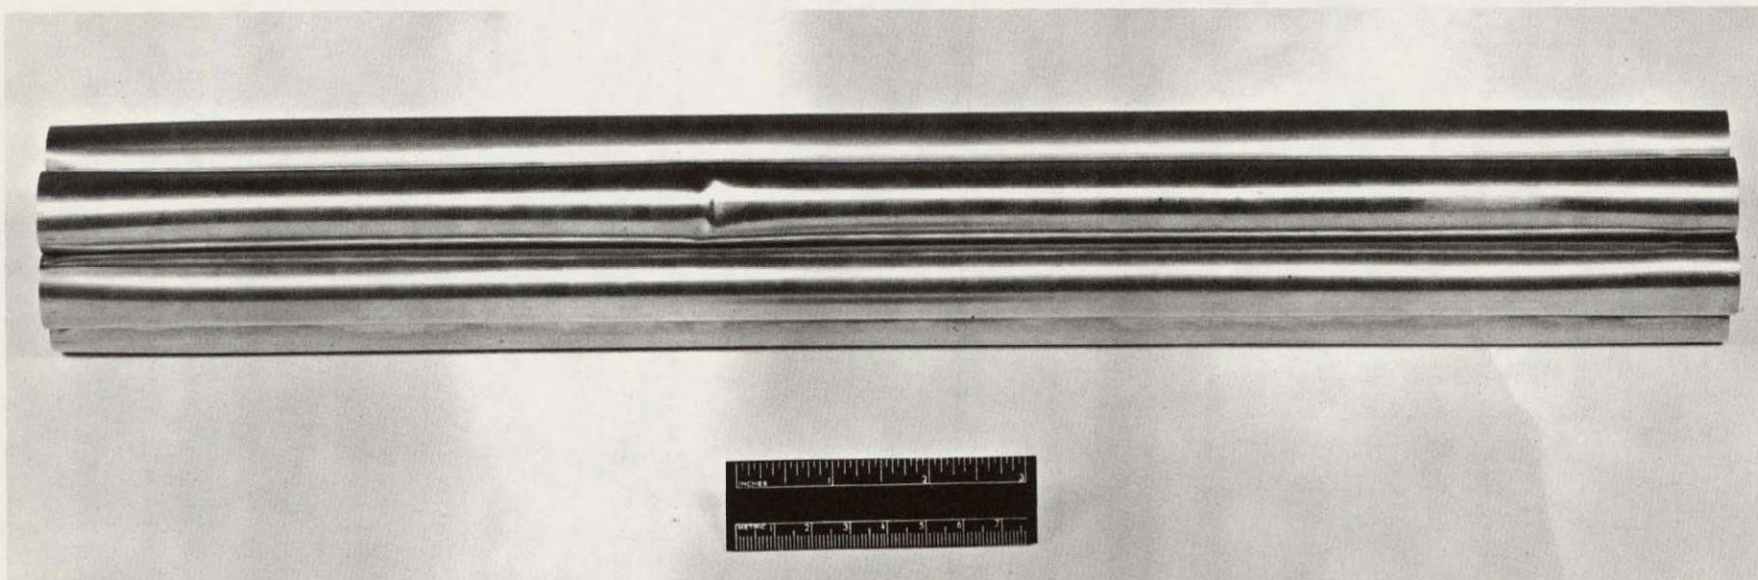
T-111 Seven-Tube GTA Welded Bundle - Full-Length Honeycomb Tubes. (Note Pronounced Buckling on Exposed Surface of One Tube.) (70-9-9)
